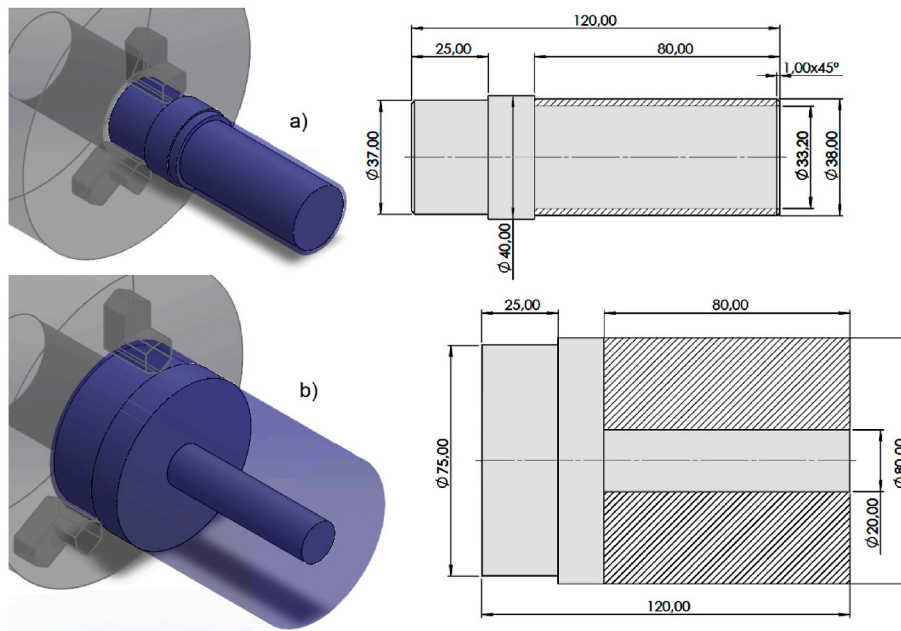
Dimensions in the turned aluminum specimens (mm): a) ABCD test rounds, b) E test round.
